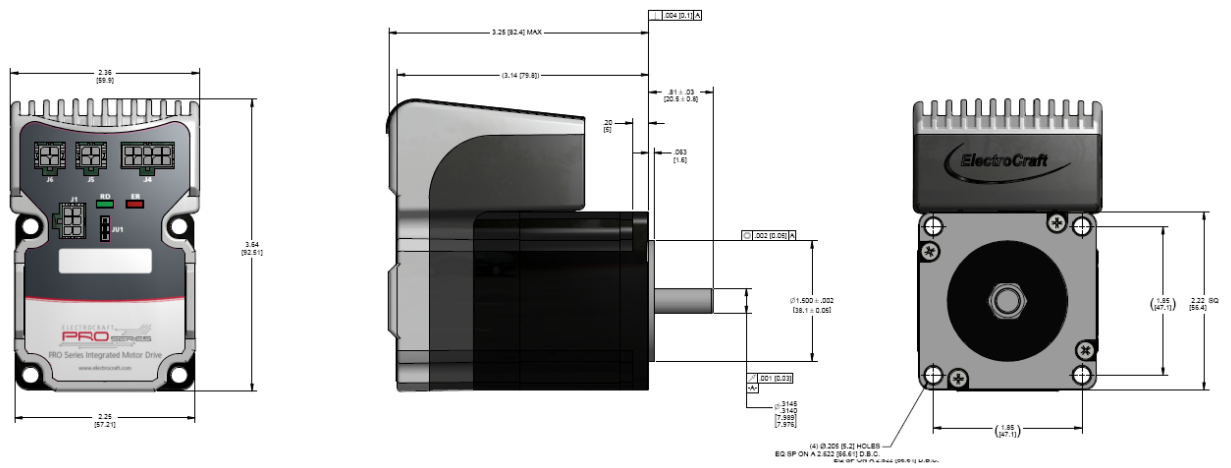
PT56-A106V48A-0-X-CAN mechanical dimensions.
